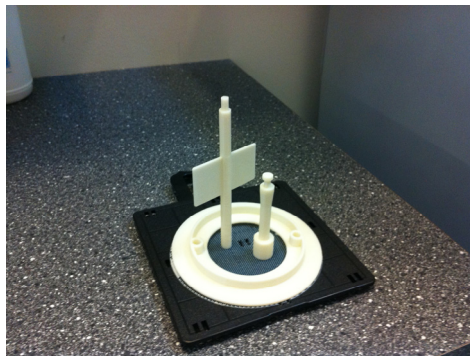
Prototype and lid of the Jar-tester (JT) printed in an ABS 3D printer Mojo®
